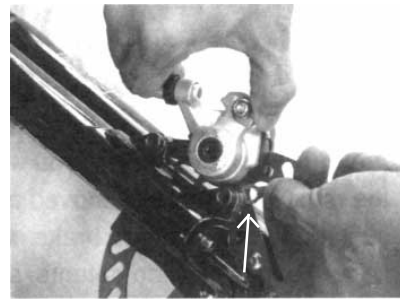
Squeezing the actuator arm while inserting a washer to achieve alignment
